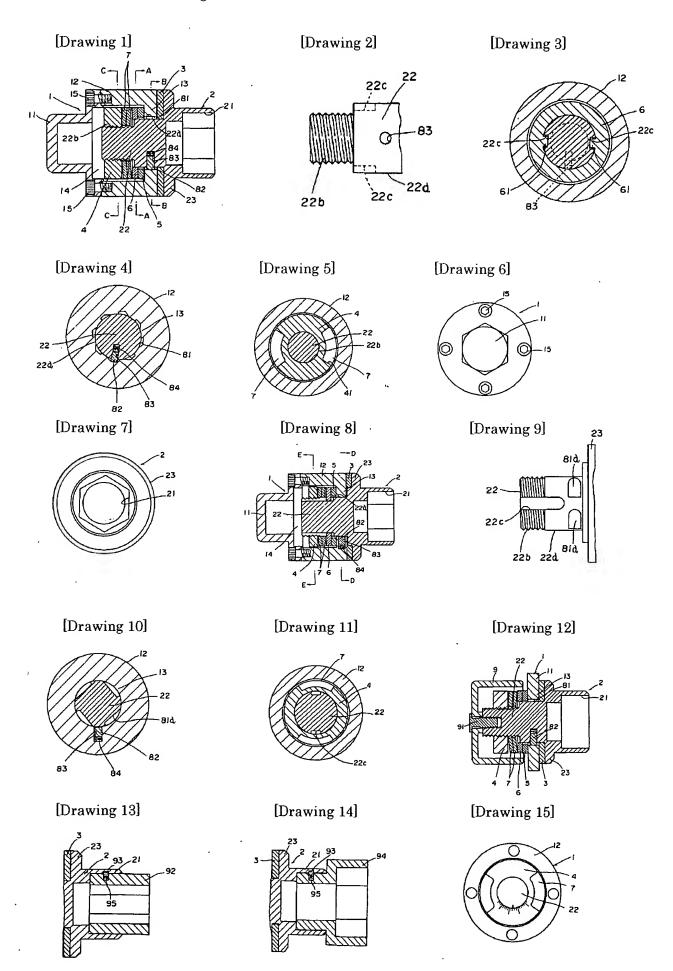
It is the drawing which formed the torque accommodation graduation in the shank and set torque controller material in a constant torque band of this invention.
